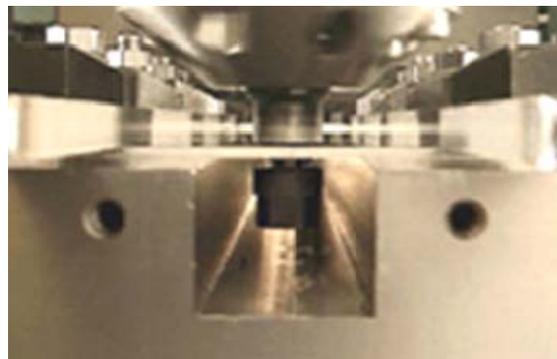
Photograph of Bobbin Tool Friction Stir Welding [7]
